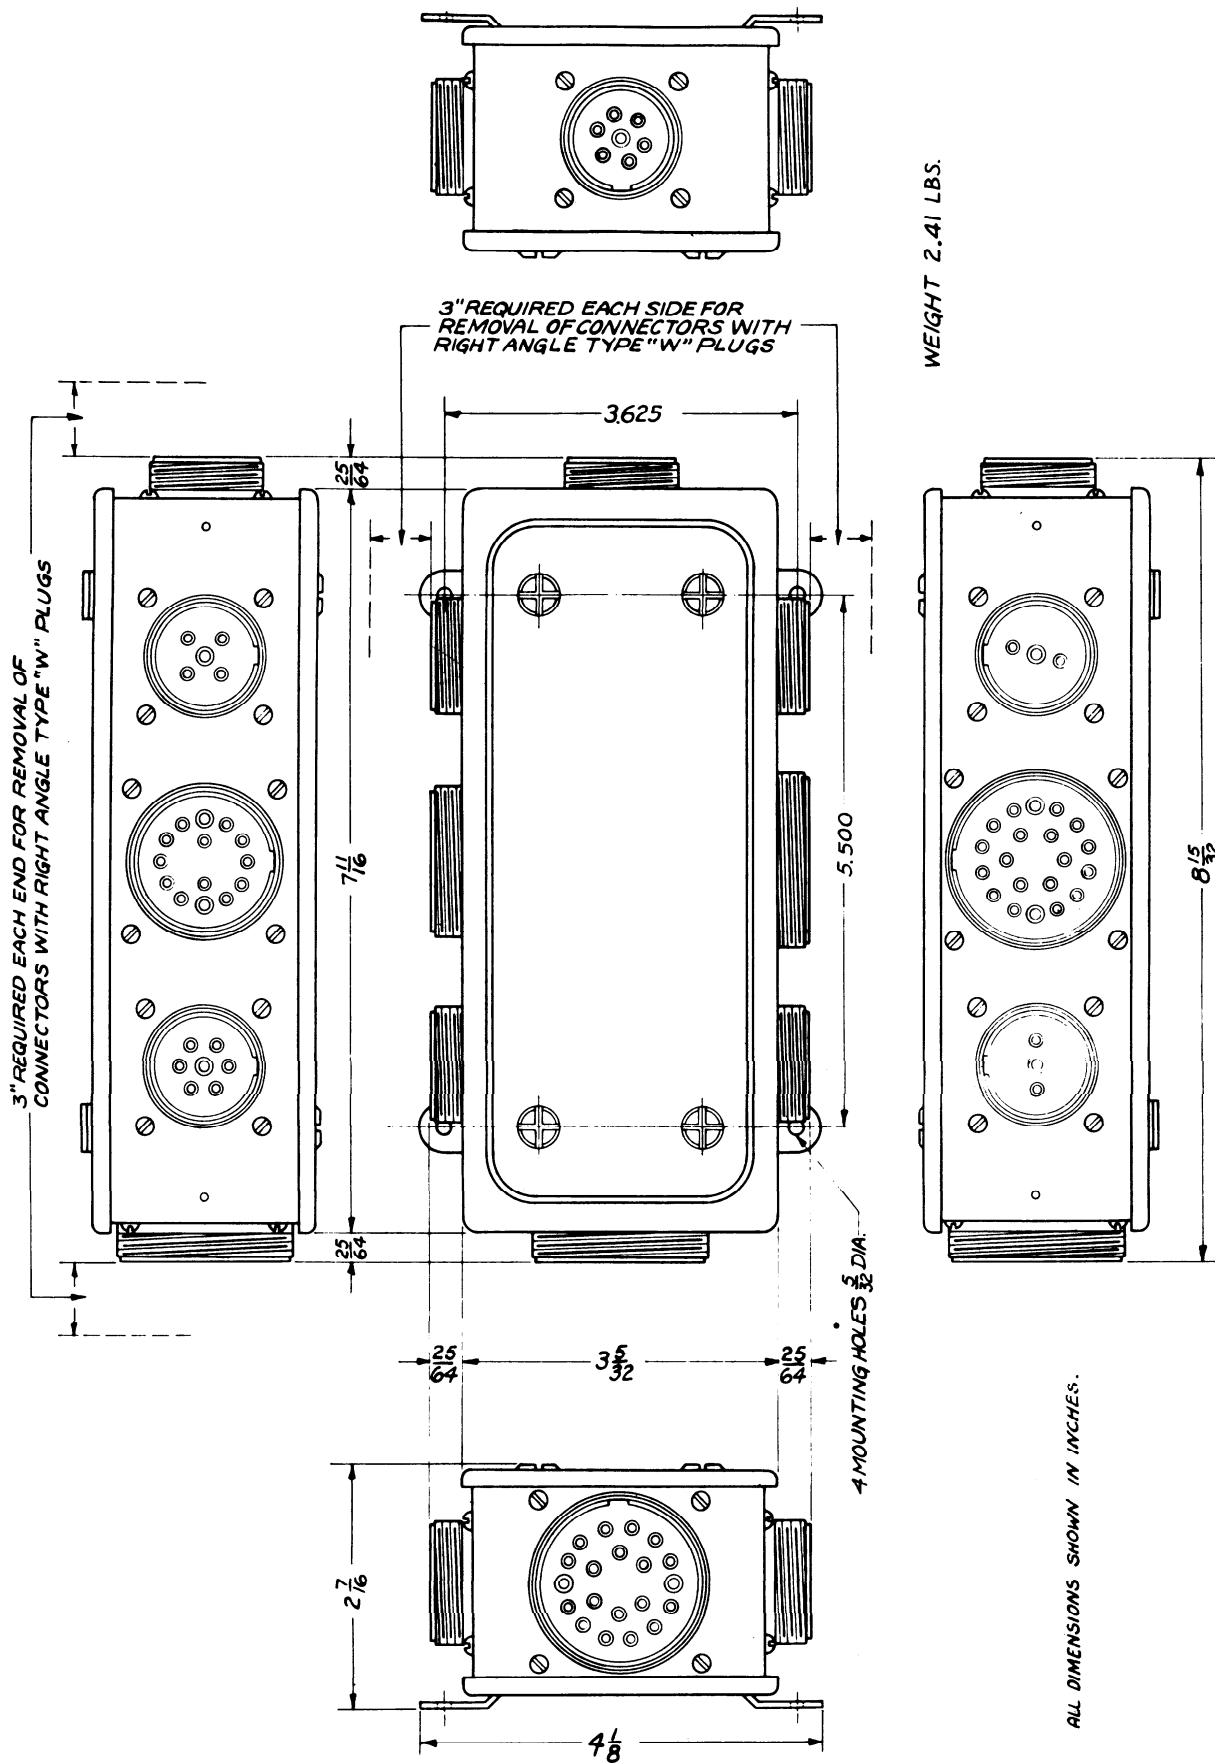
JUNCTION BOX JB-29-A, OUTLINE AND MOUNTING DIMENSIONS
